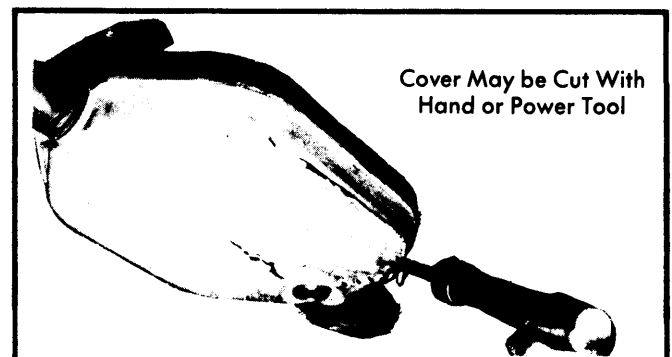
Removal of Converter Bottom Cover on General Motors Vehicles Only
